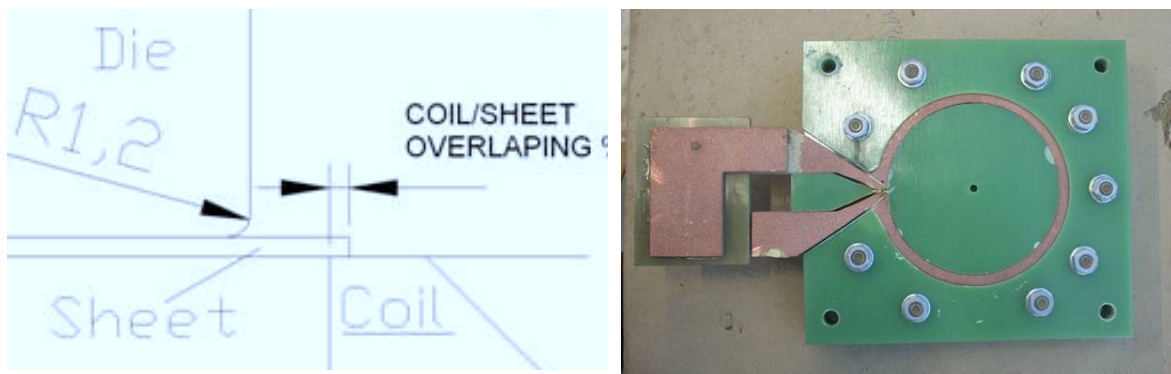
Partial section view of the circular flanging set-up (left) and one of the EM flanging coils (right) used in these experiments.
